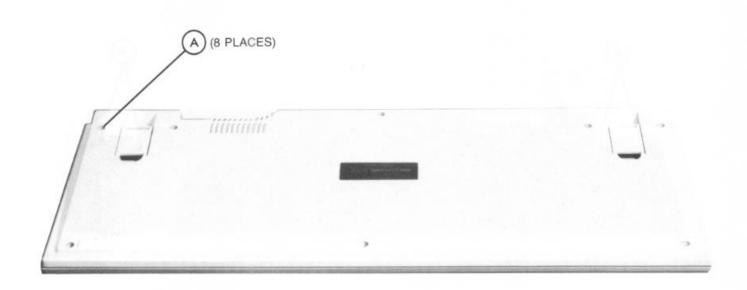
KEYBOARD CASE REMOVAL/REPLACEMENT
